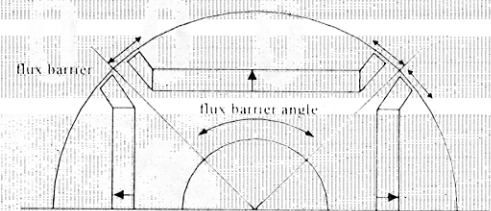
Geometric layout for reducing cogging torque in IPMSM
